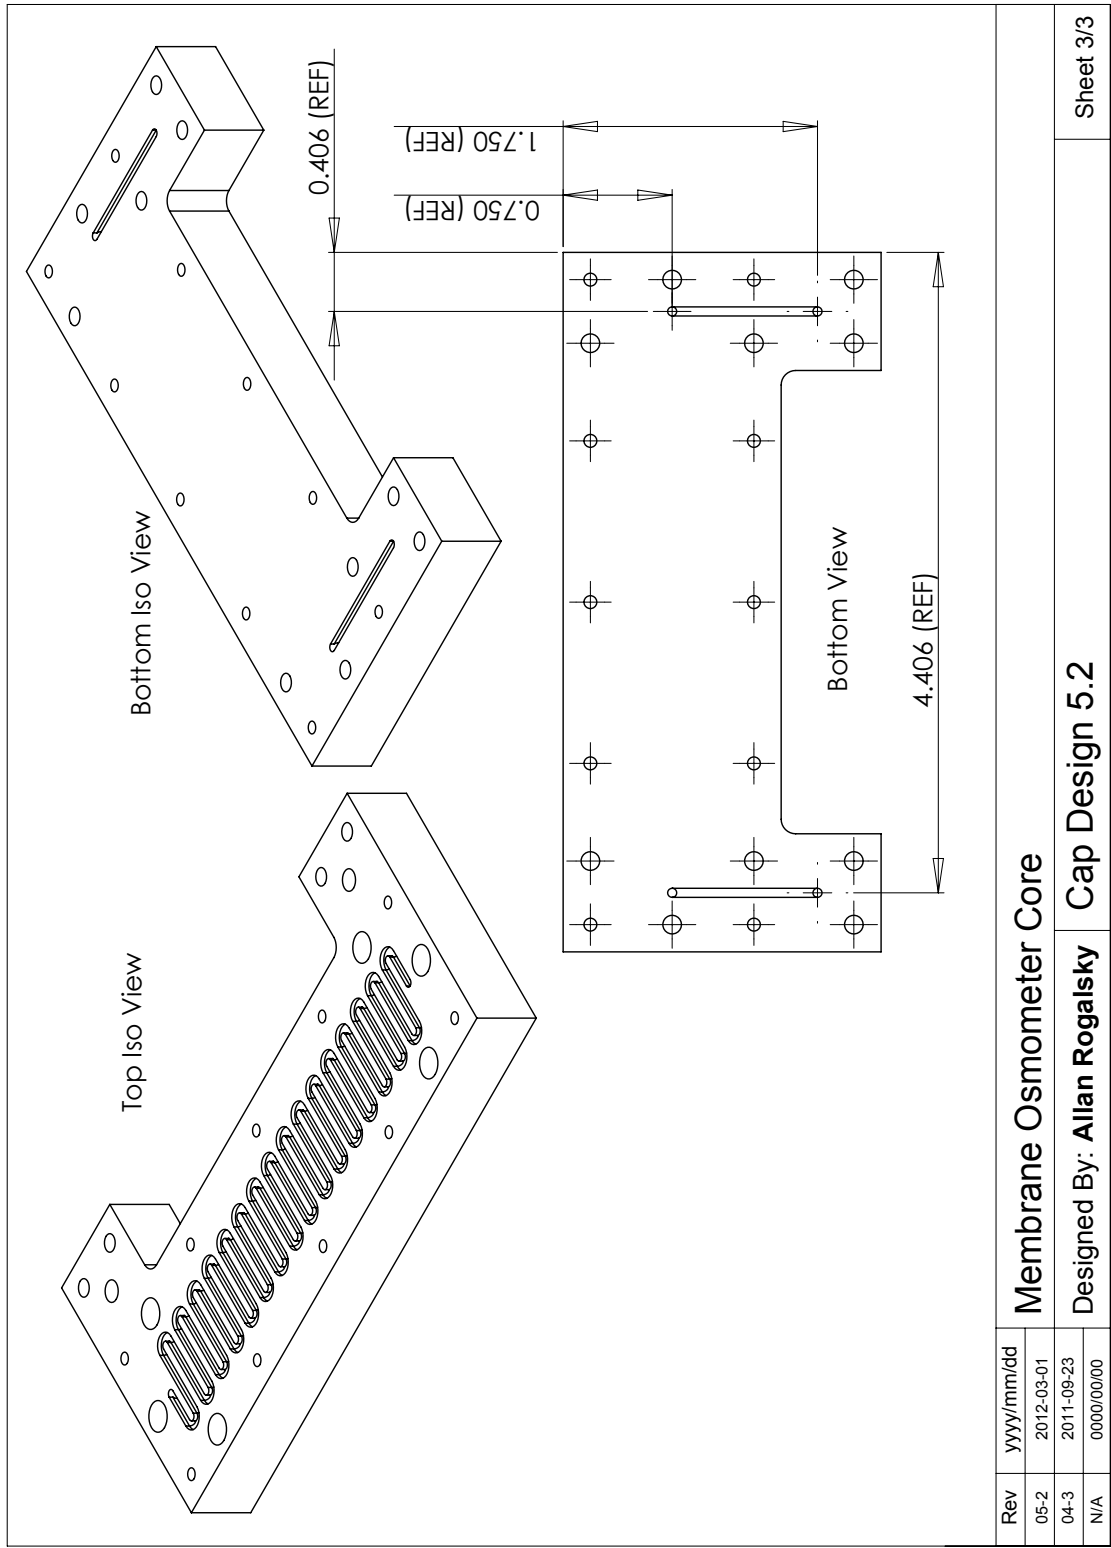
Osmometer Top Level 5.2 / Core Assembly 5.2 / Cap 5.2 / Sheet 3
